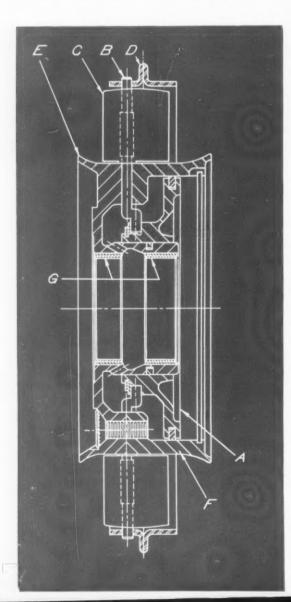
Sectional drawing of stator shows cranks (B) mounted in carrier ring (D) and between front and rear carriers (E) and (F). Vanes are seen at (C).
